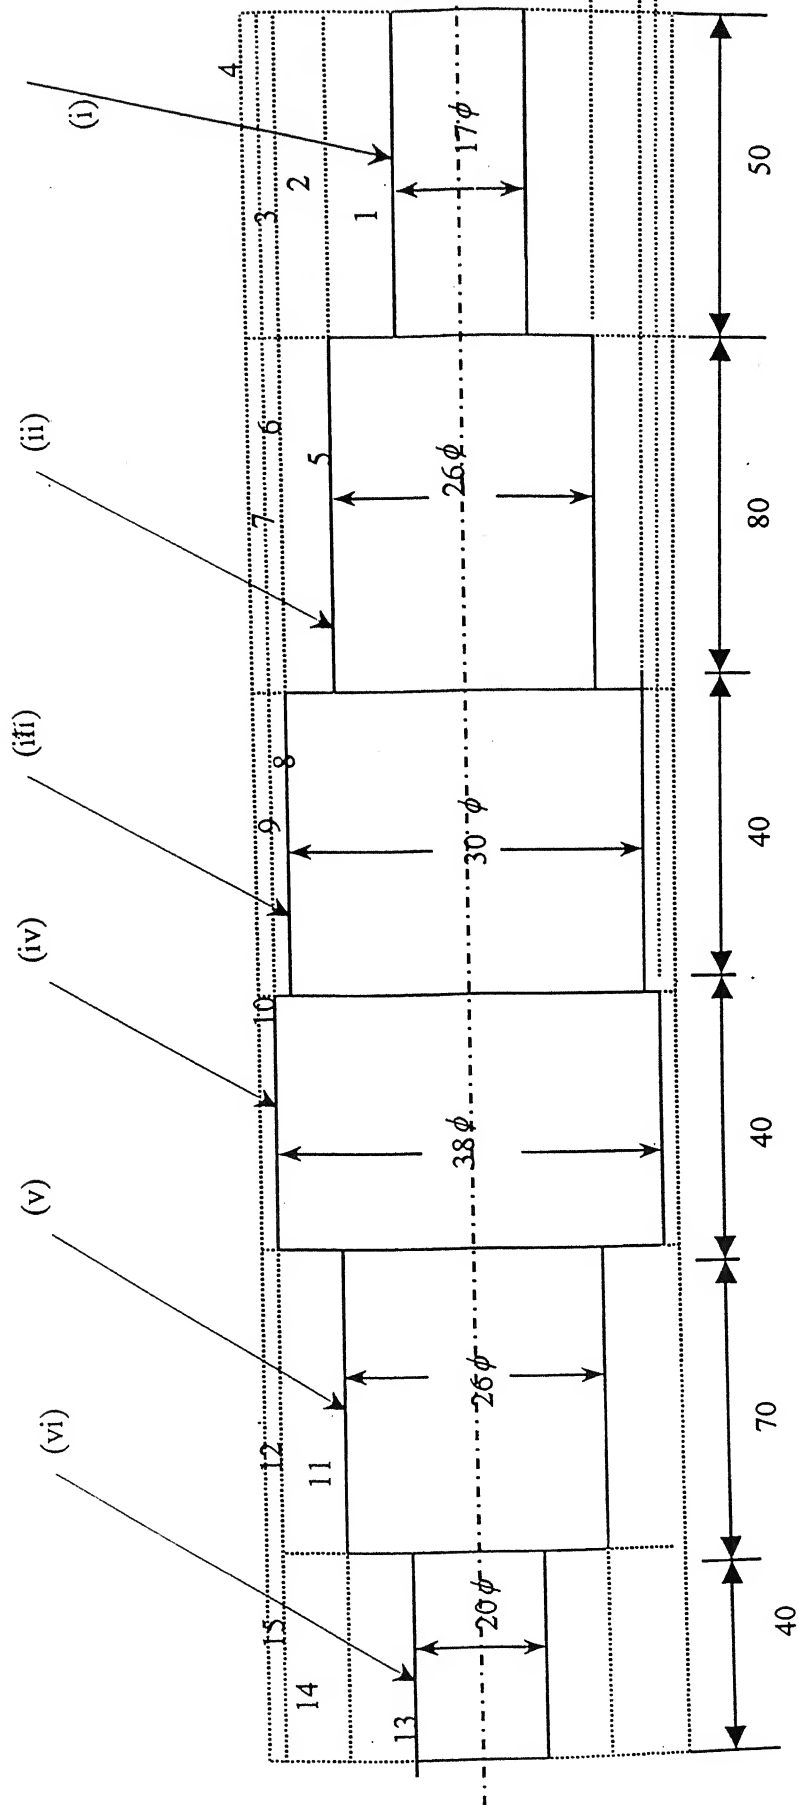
Rough turning of a stepped shaft from 42 mm diameter blank
